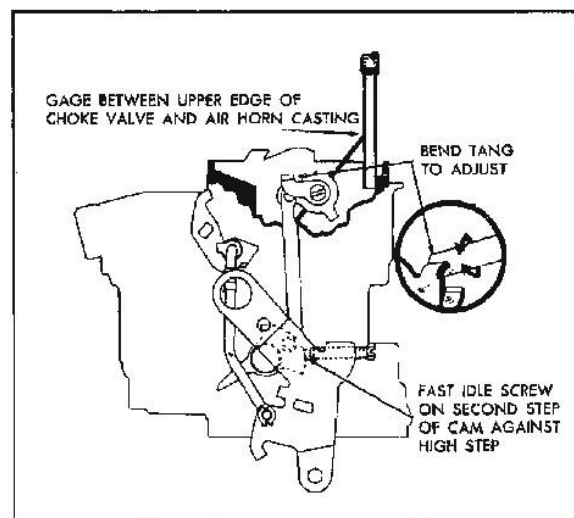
B-107 Adjust Choke Rod (Center Carburetor)
